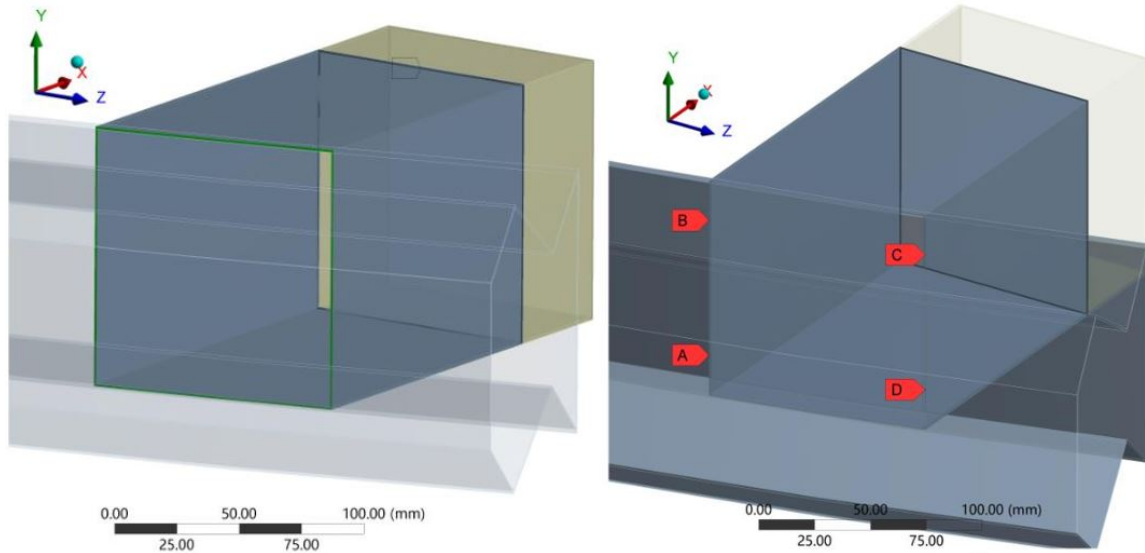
Connection method between bonded (Left) and welded L+R (Right)
